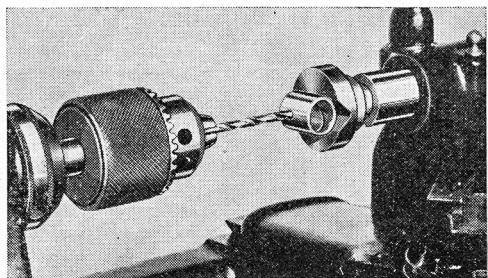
Drilling an oil hole in a bushing with crotch center in tailstock.
